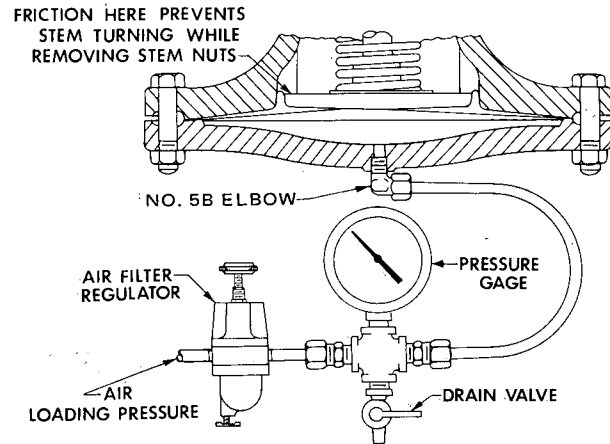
Air Loading Arrangement for Removing Stem Nuts.
